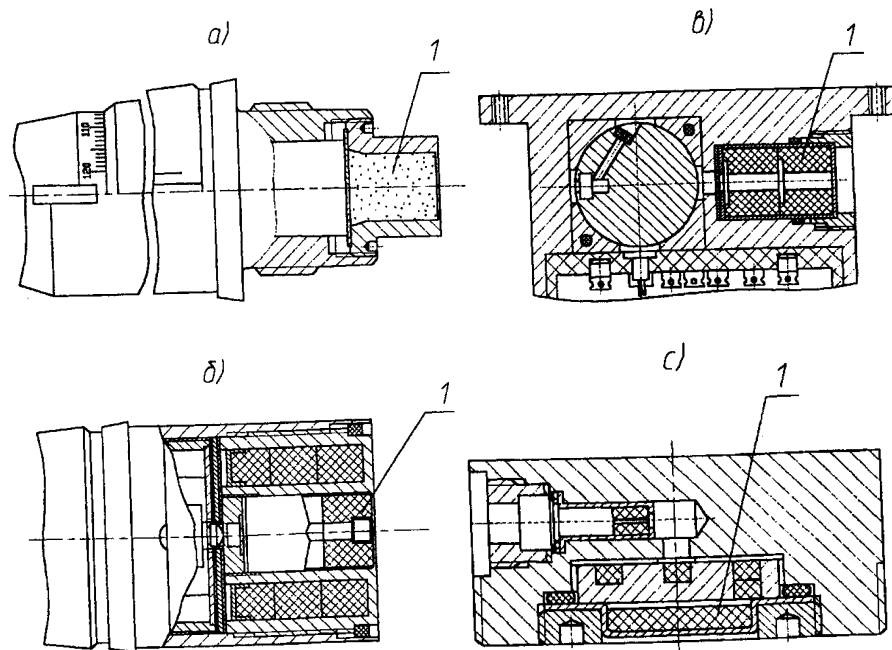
Schemes of initiating devices used in models: a) mechanical tube TM-120, b) remote-contact exploder 9E260, c) safety-actuating mechanism 9E268, d) compartment separation device 9X59 (1 - powder squib)
